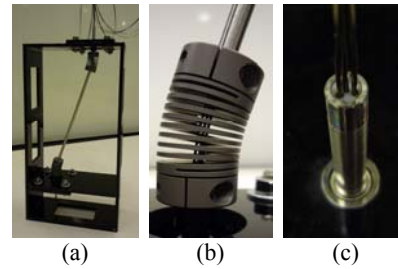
Prototype of the flexural transmission: (a) overall assemblage; (b) hollow flexible joint; and (c) tube cover
